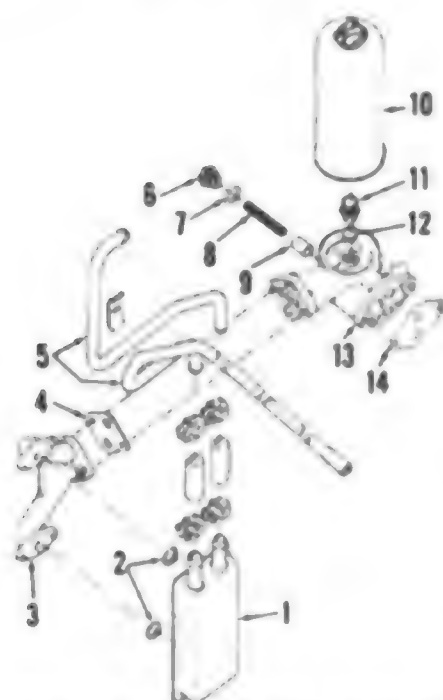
Exploded view of engine oil cooler and oil filter assembly used on Model 884. Oil cooler relief valve (6 through 8) is located in filter base (13).
